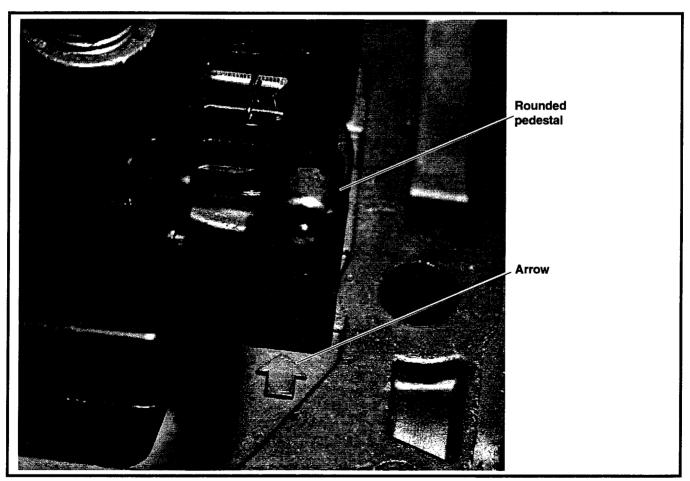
View of Carburetor Float Pin Pedestals With Cast-in Arrow
